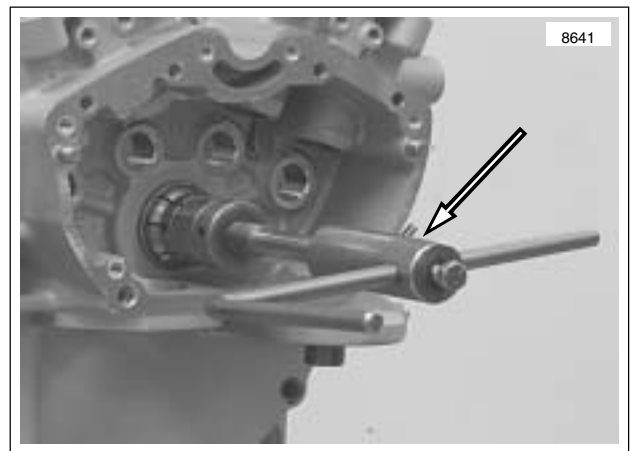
Lapping Pinion Shaft Main Bearing with Crankcase Main Bearing Lapping Tool (Part No. HD-96710-40B)
